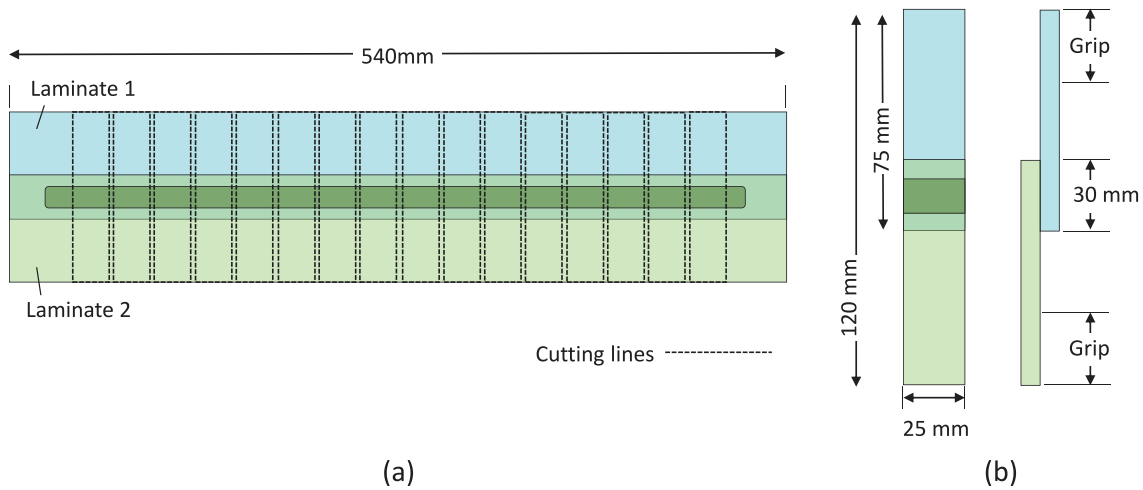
Welded joint validation specimen: (a) Welded laminates and SLS cutting scheme; (b) SLS specimen dimensions.
